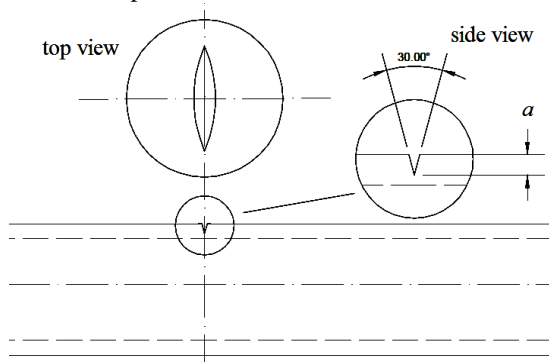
Schematic drawing of a tube with a sharp-cut depth of a .
